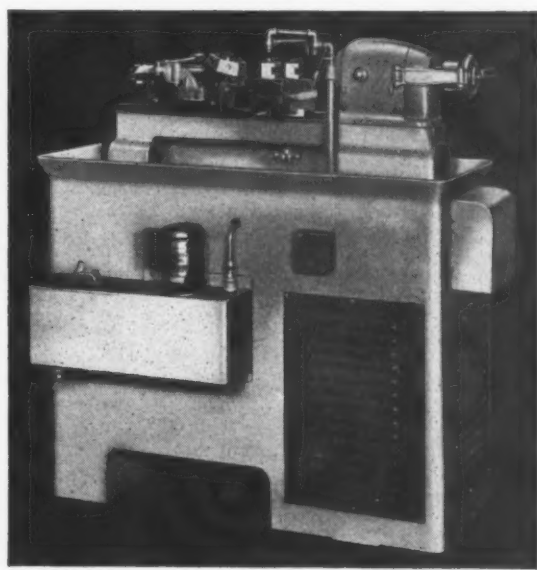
Rear View of Elgin Screw Machine with New Pedestal and Coolant System
